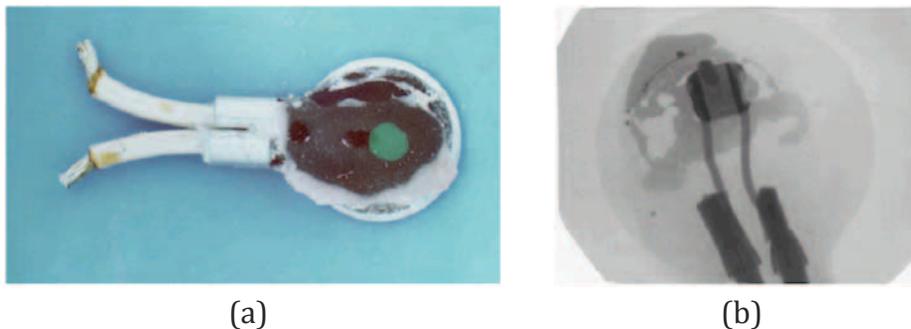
(a) Overall view of the thermistor after it was removed from the circuit, and (b) X-ray view of thermistor showing reflowed solder.
